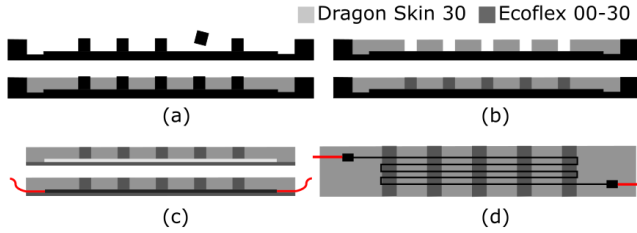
Fabrication of strain sensor. (a) Assembly of small blocks with the mold and pouring of Dragon Skin 30. (b) Casting Ecoflex 00-30. (c) Sealing the microchannel with spin-coated layer and filling with EGaIn. (d) Top view of the sensor.
